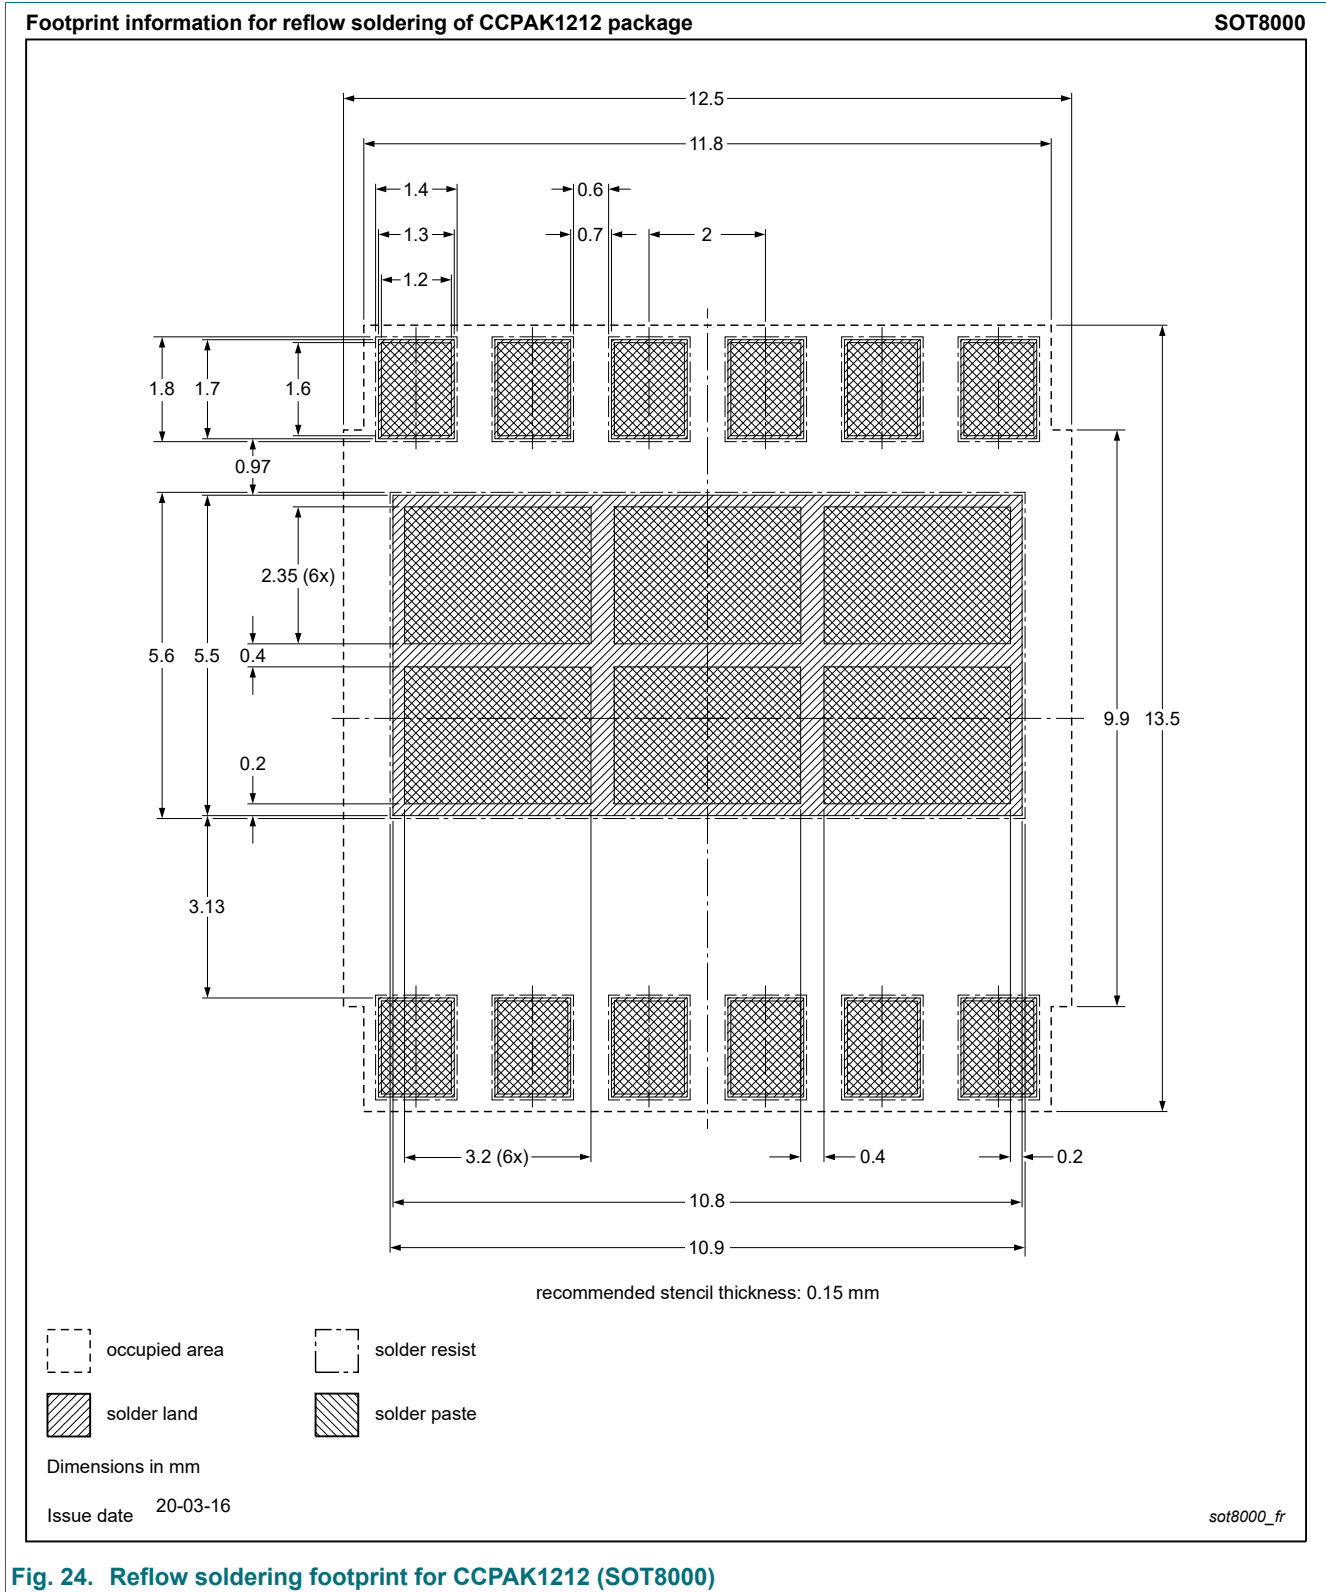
Reflow soldering footprint for CCPAK1212 (SOT8000)
